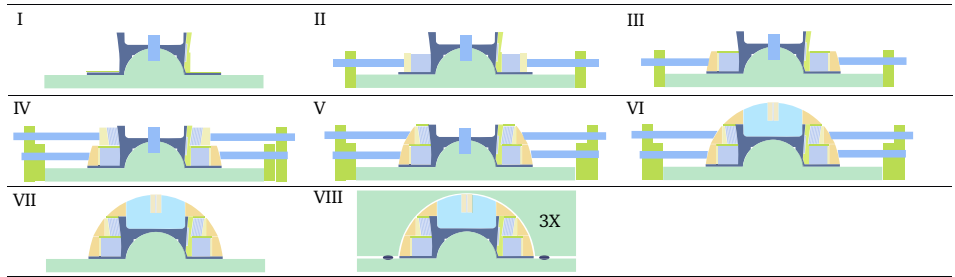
Illustration of the steps required to wind and impregnate a pole of the Feather-M2: I. Mounting of layer jump, II. Winding of Central deck, III. Mounting of Ring 1, IV. Winding of wing deck, V. Mounting of Ring 2, VI. Mounting of poles and Ring 3, VII. Remove winding tooling, VIII. Add impregnation mold and perform impregnation.
